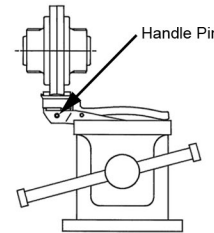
1.0" to 2.0" Valves: Remove handle, if fitted, by removing the handle pin as shown to the left.
